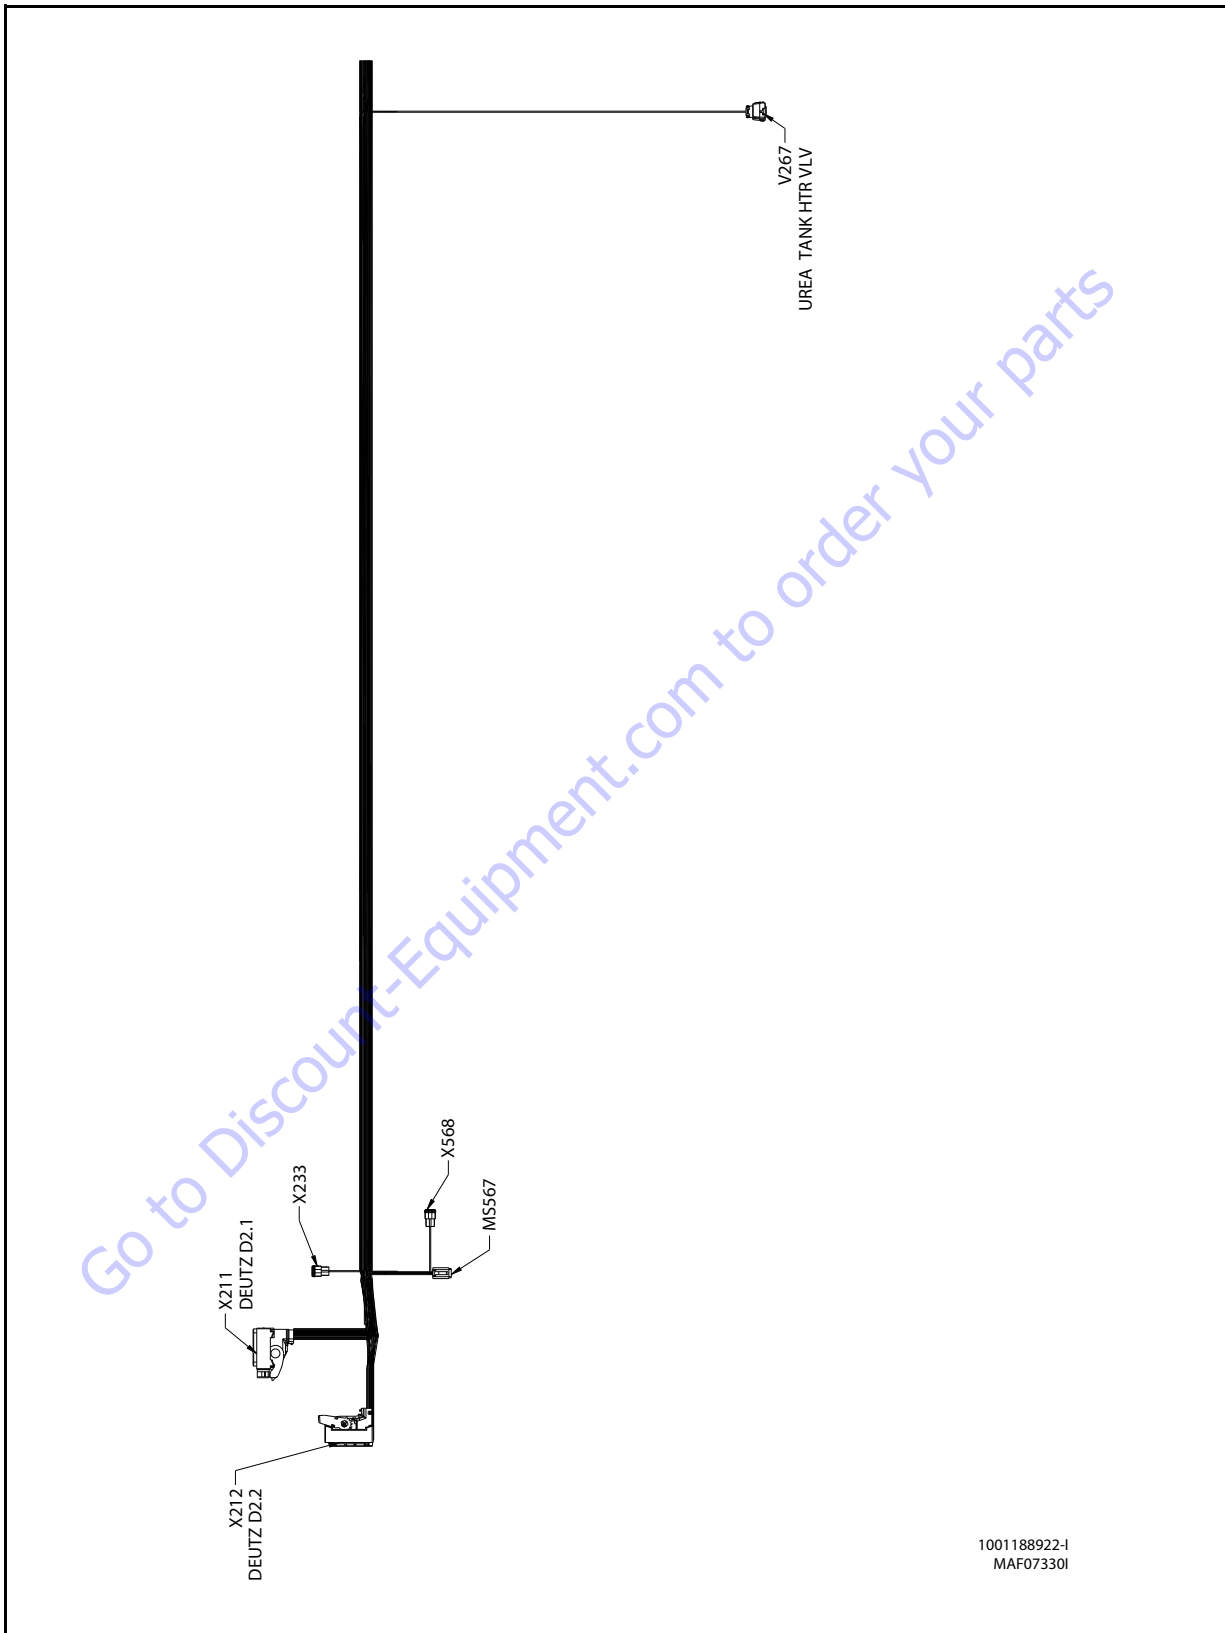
T4F Engine Harness - Sheet 2 of 7
